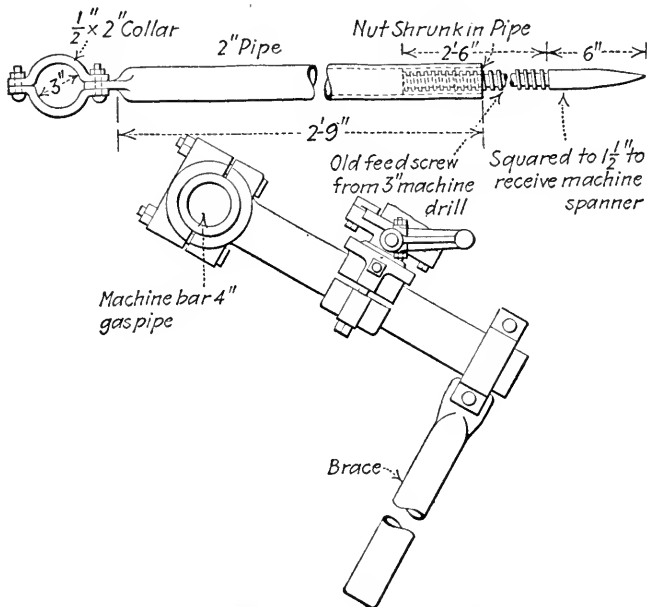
DRILL-ARM STEADIER USED IN HANCOCK SHAFT.
